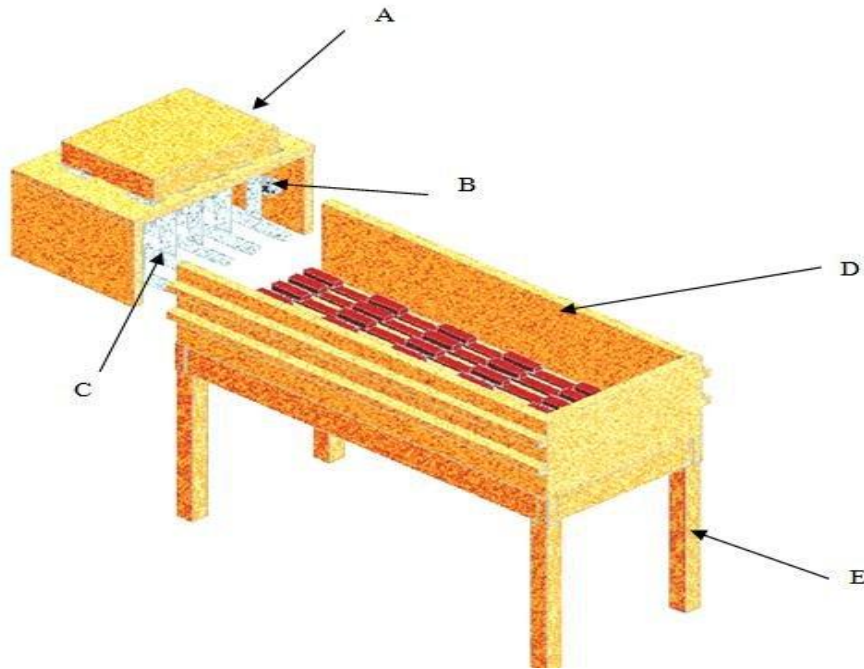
Component parts of the potato cutting machine. Source: Aremu *et al.* (2017)
